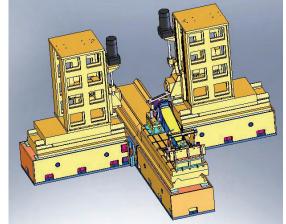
3D Model of the basic variant of an ETS for double sided coaxial processing of openings in welded constructions
